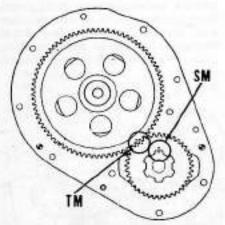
View showing installation of timing gears on 1190 models, install crankshaft gear with spline marks (SM) eligned as shown, install camshaft gear with "D", or punch mark, meshed between the two punch marked teeth of crankshaft gear as shown (TM).
